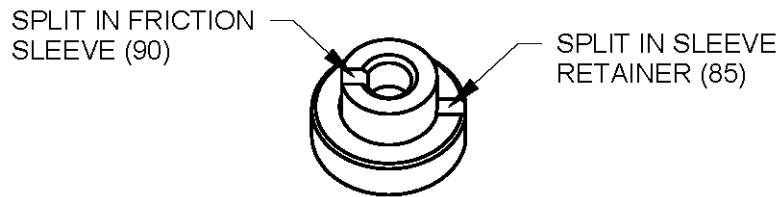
Installing friction sleeve (90) into sleeve retainer (85)
